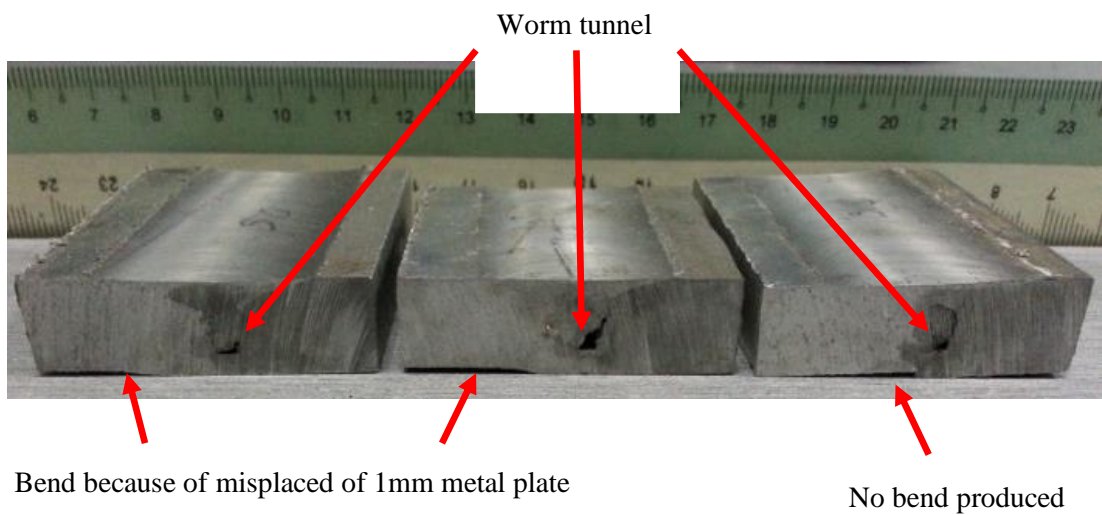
Middle cross section of the sample (from left; 25 mm/min, 30 mm/min, 35 mm/min).
